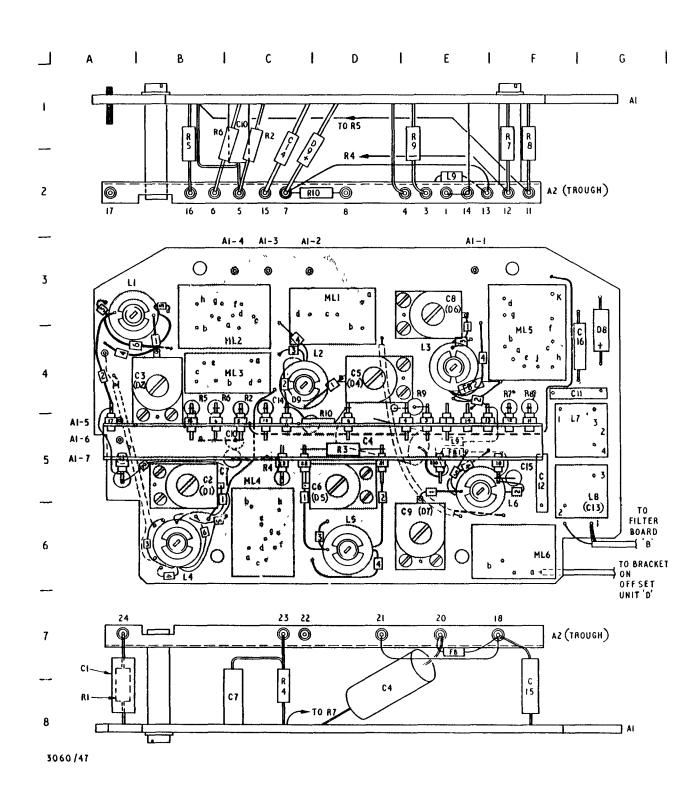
Board A and trough A2, r.f. unit, component layout
